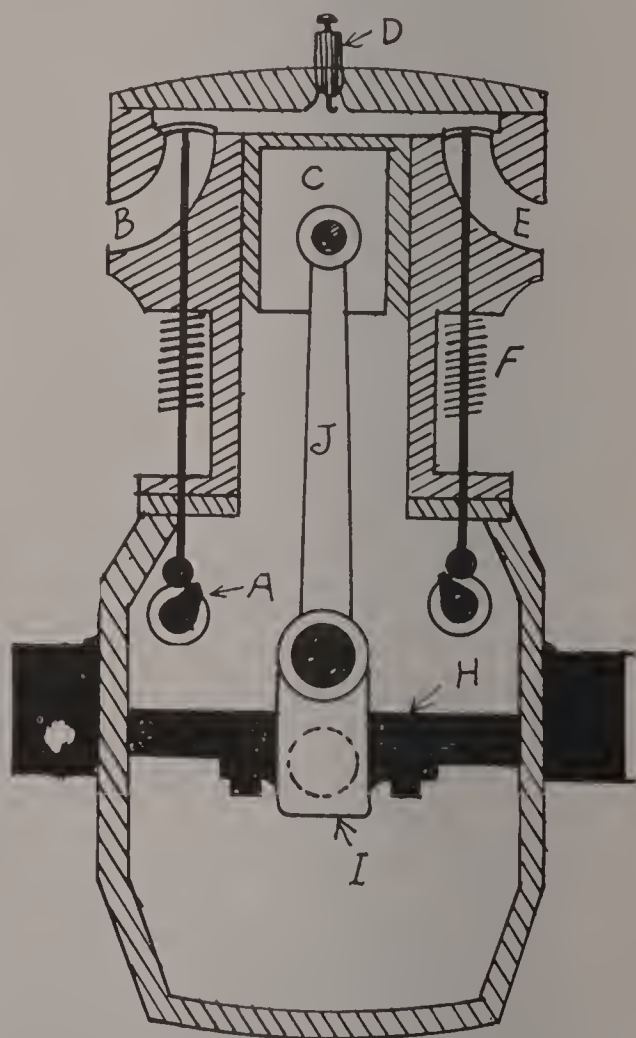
A—Valve-Lifting Cam; B—Intake Valve; C—Piston; D—Spark Plug; E—Exhaust Valve; F—Valve Spring; H—Crankshaft Support; I—Crankshaft; J—Connecting Rod.
